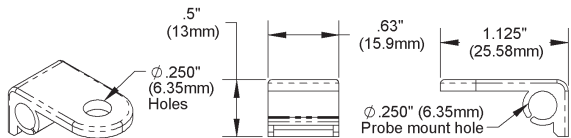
Flexible Probe Bracket Break-Off Tab Dimensions and Mounting of Remote Probe
